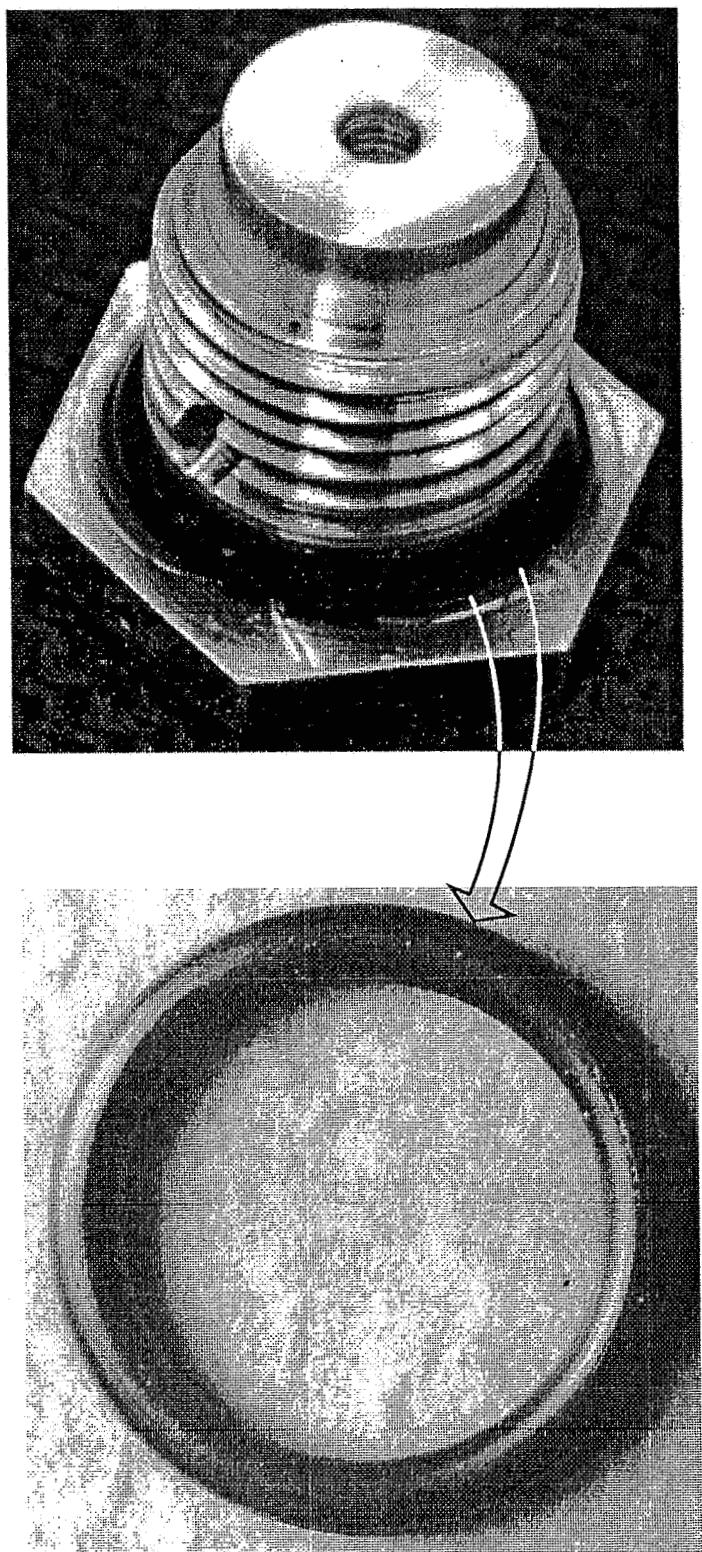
Viscous Damper Fill Port Plug Ethylene Propylene O-ring Seal.
